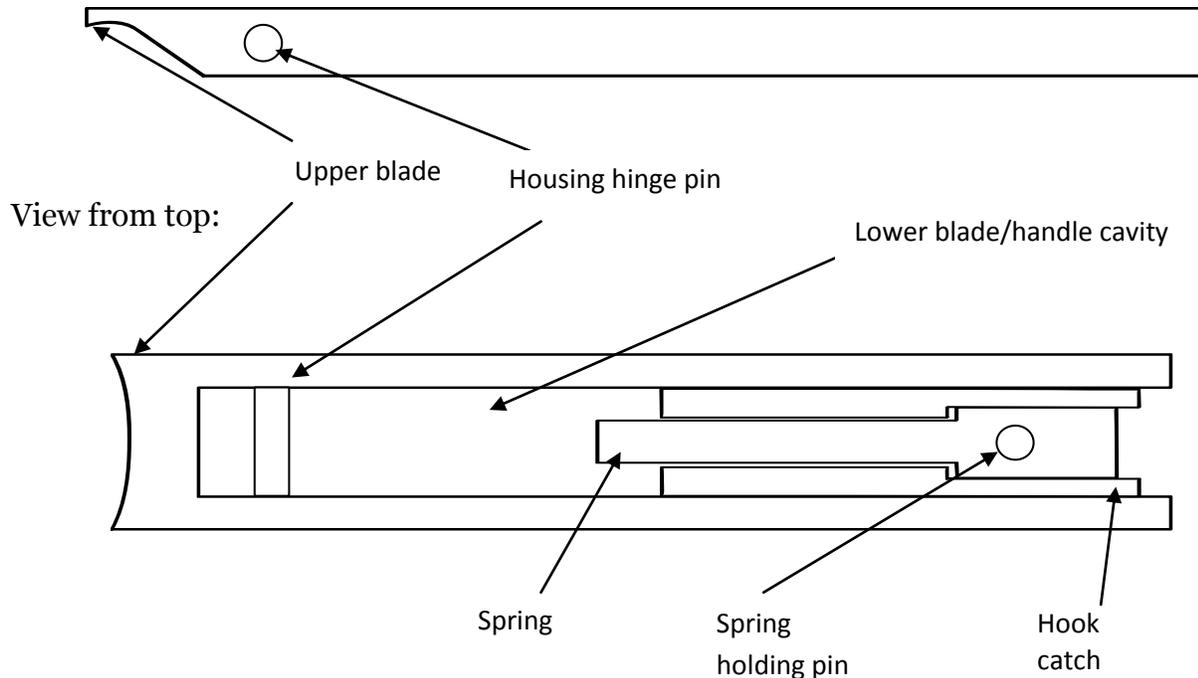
diagram of the nail clipper housing from two different viewpoints. The lower blade/handle cavity is not really a component, but is an important feature.
